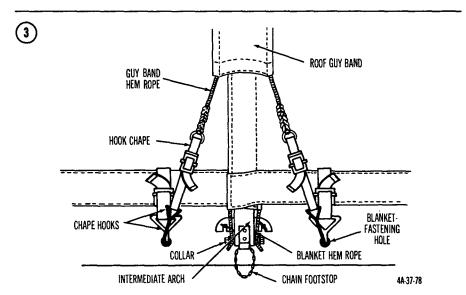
Attaching roof blankets and roof guy bands to frame of tent, frame-type, insulated, sectional.
